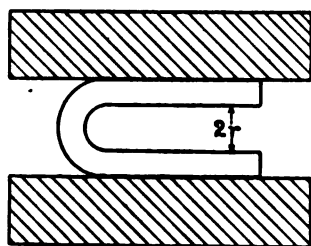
METHOD OF CARRYING OUT BEND TEST, SHOWING FINAL POSITION OF SPECIMEN.
